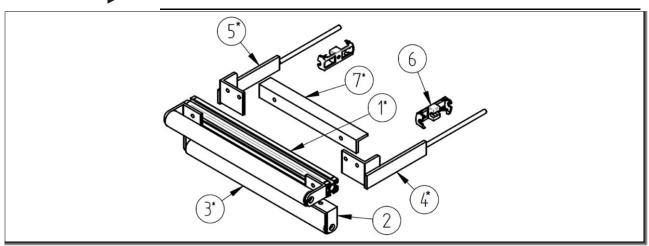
Parts list: Multi-tech rolling knife edge Ø32- ZZ.995.0189.02-1
